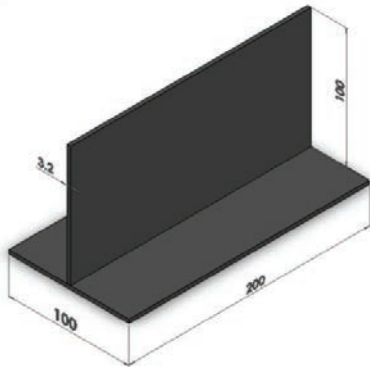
Schematic illustration and relative dimensions (in mm) of the joint.
